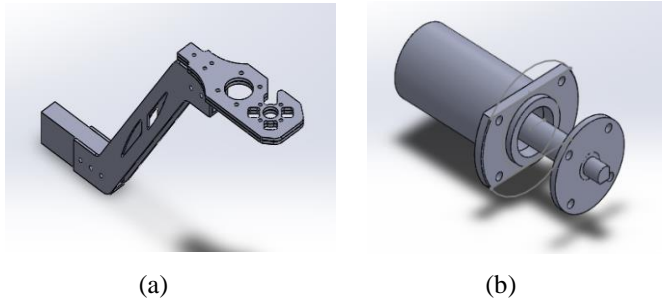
Computer model of (a) the arm, and (b) main shaft bearing.
